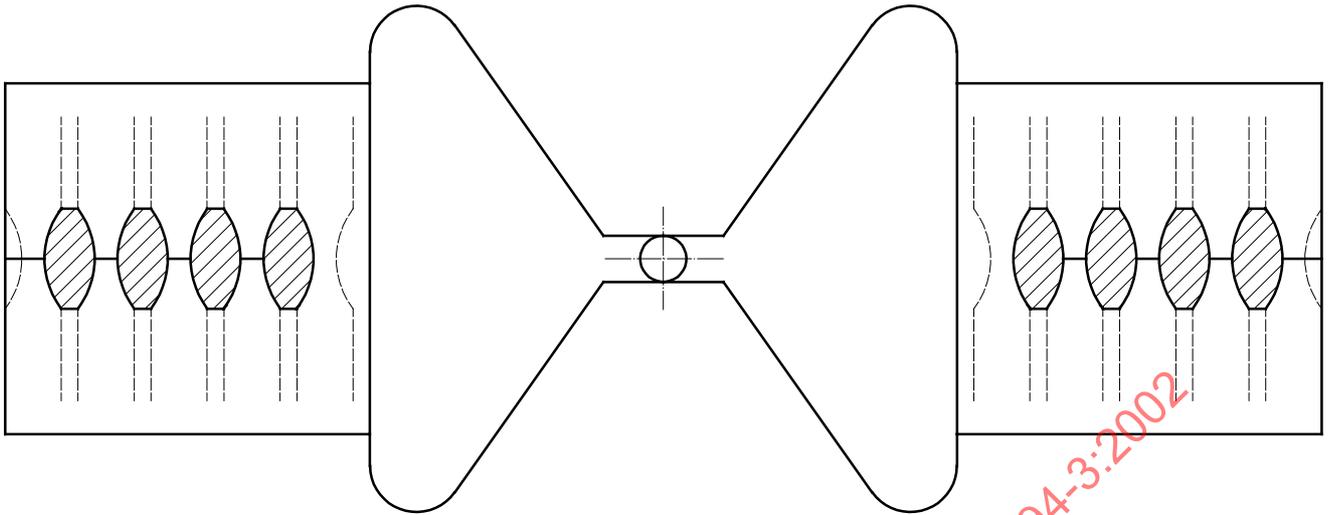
Moulding produced using multiple inserts (hatched), showing the locations from where tensile test specimens can be taken (dashed lines)
